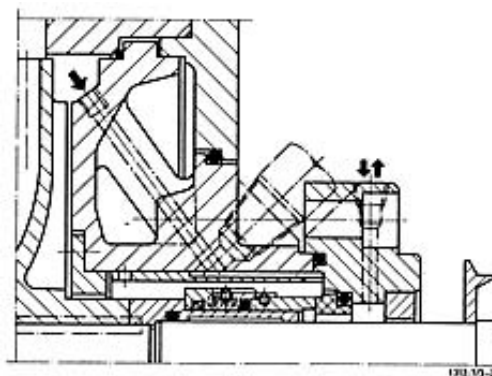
Single acting balanced mechanical seal with circulation borehole and quench seal
